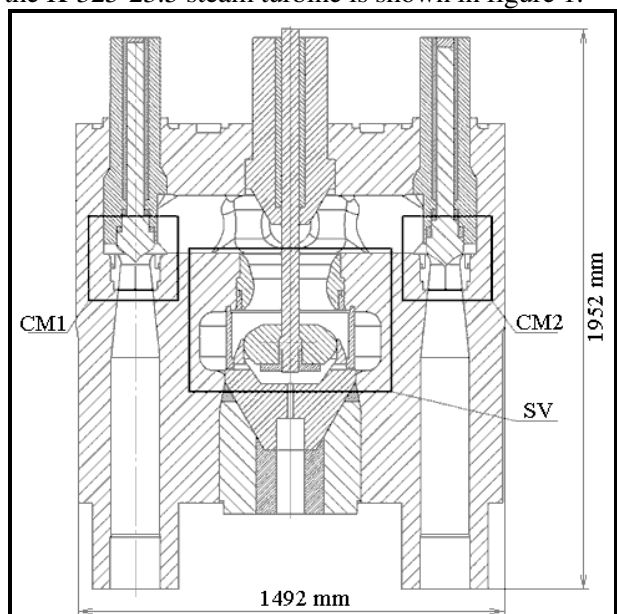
Stop and control valves of the K-325-23.5 steam turbine
